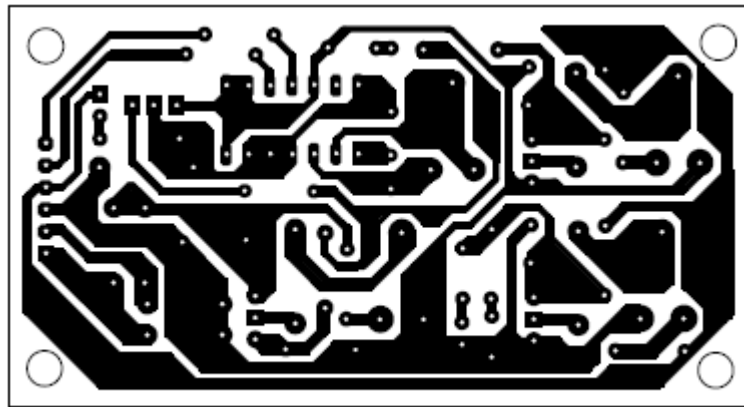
An actual-size, single-side PCB for the sinewave inverter
